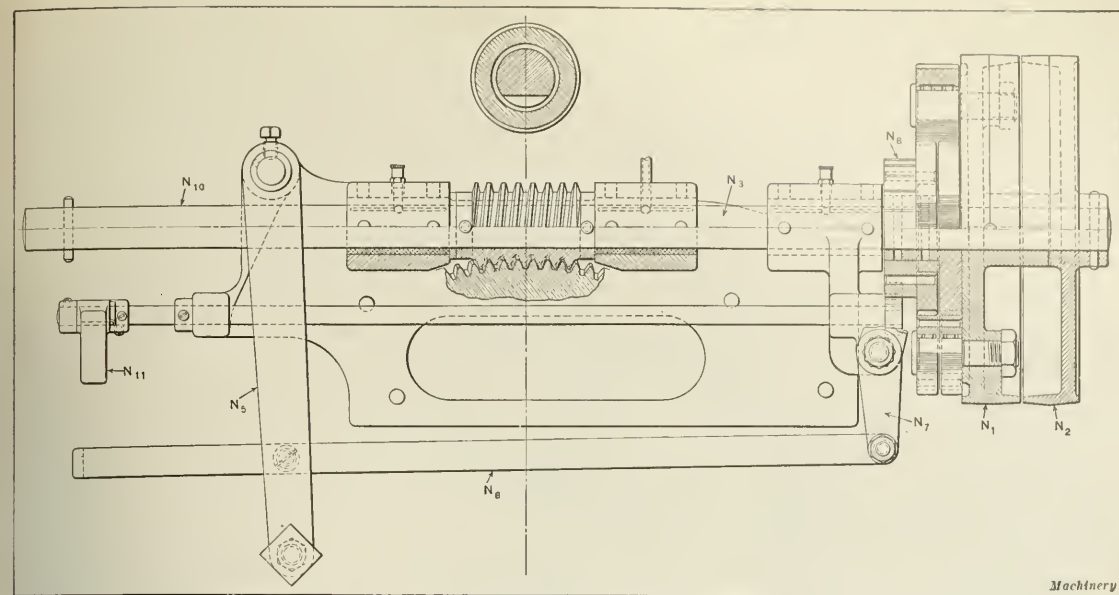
Sectional View through Power Feed Bracket, showing Differential Gear Mechanism and Indexing Worm and Driving Worm and Worm-wheel
